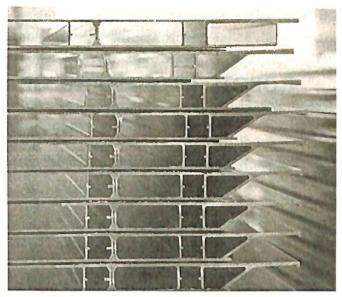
Hat profiles stacked for shipping. Definitely no straightening needed after the welding process. Photo : Hydro Aluminium
